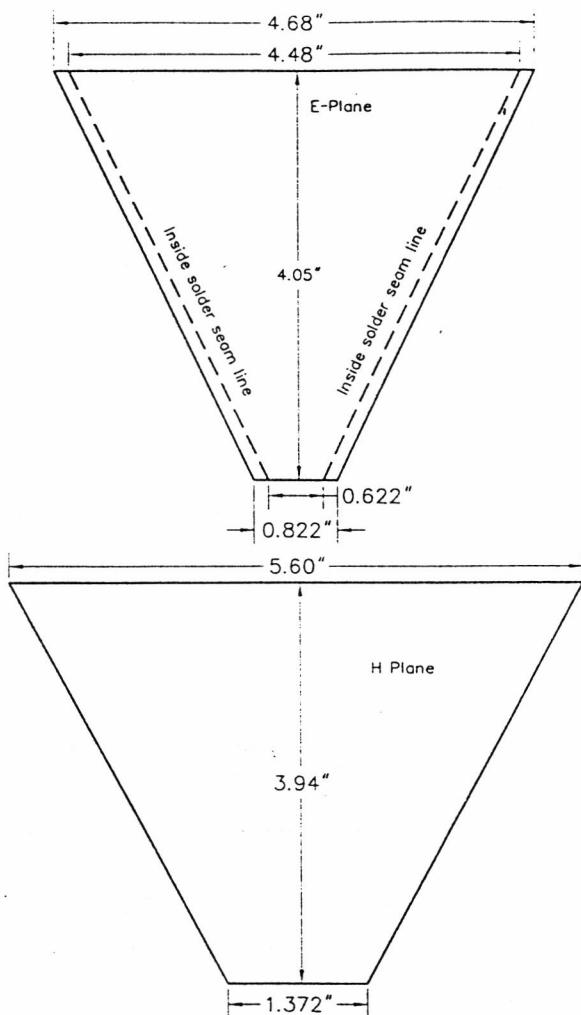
15.8-dBi 5760-MHz horn dimensions. The horn solders to WR-137 waveguide. The dotted line marks the inside solder seam.
